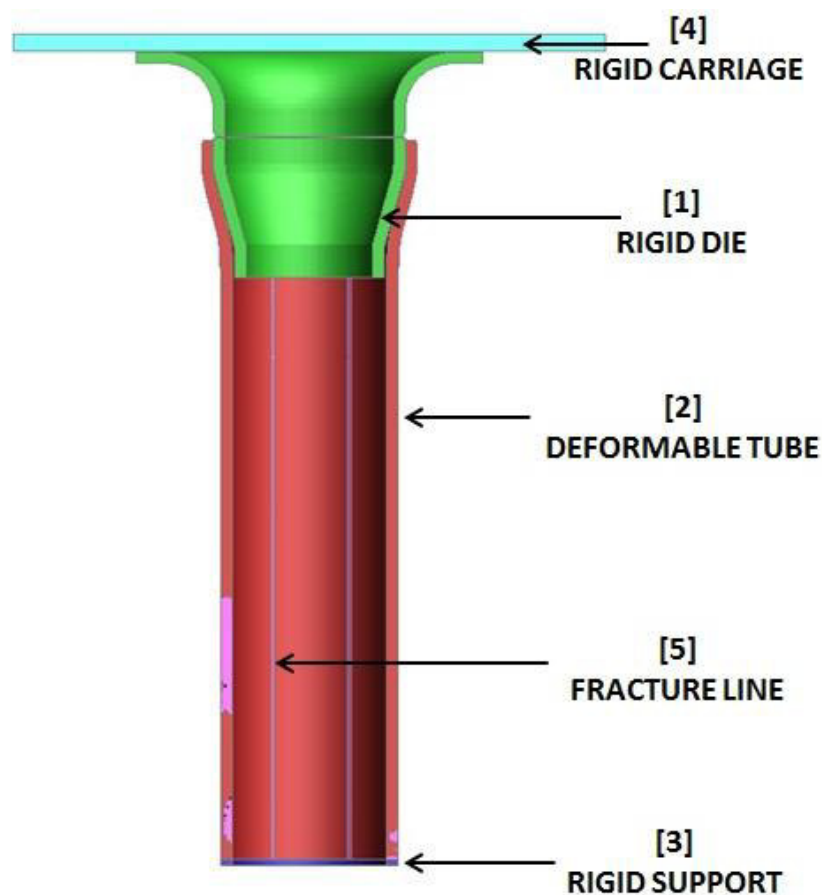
Section of the hybrid tube showing four parts: rigid die [1], deformable tube [2], rigid support [3], rigid carriage [4] and fracture line [5]
